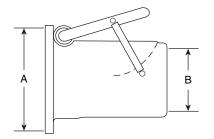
Priming valve, flanged pump end, female pipe thread discharge end
